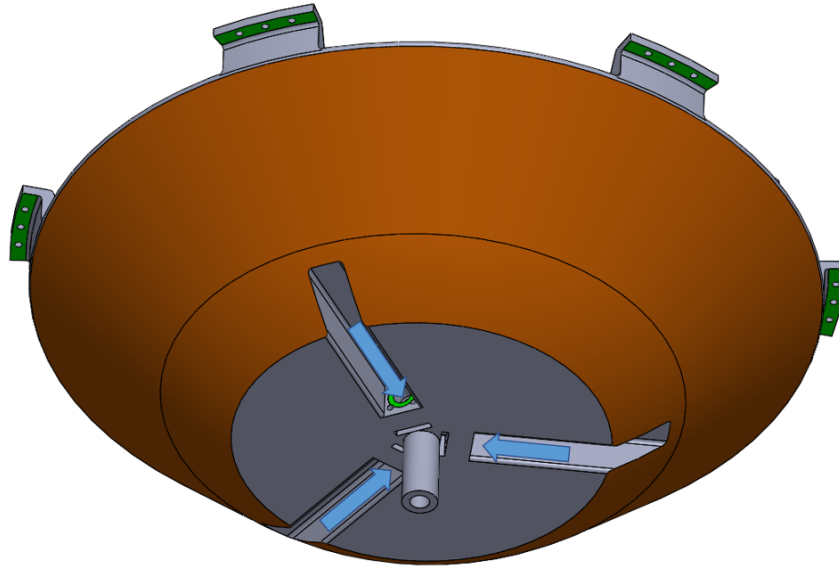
Bottom view of the instrument tray, showing machined surfaces in green and orange, and valve access channels in blue.
